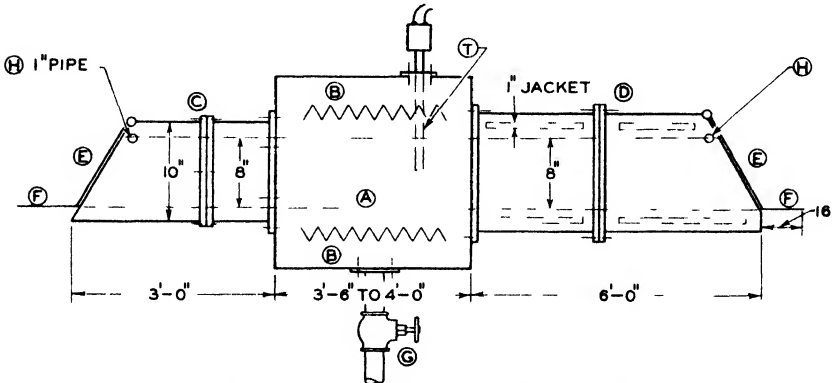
Principle of the Push-through Type of Furnace Used in the Brazing of Cutting Tools
